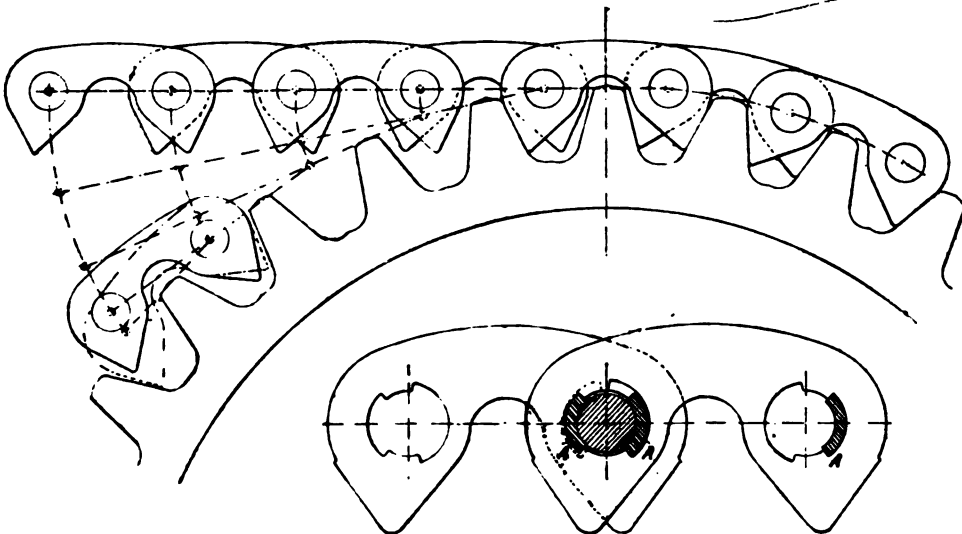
Renold Silent Chain. Appearance of chain entering or leaving wheel, with detail of joint. A, A, A. Segmental Bushings.
